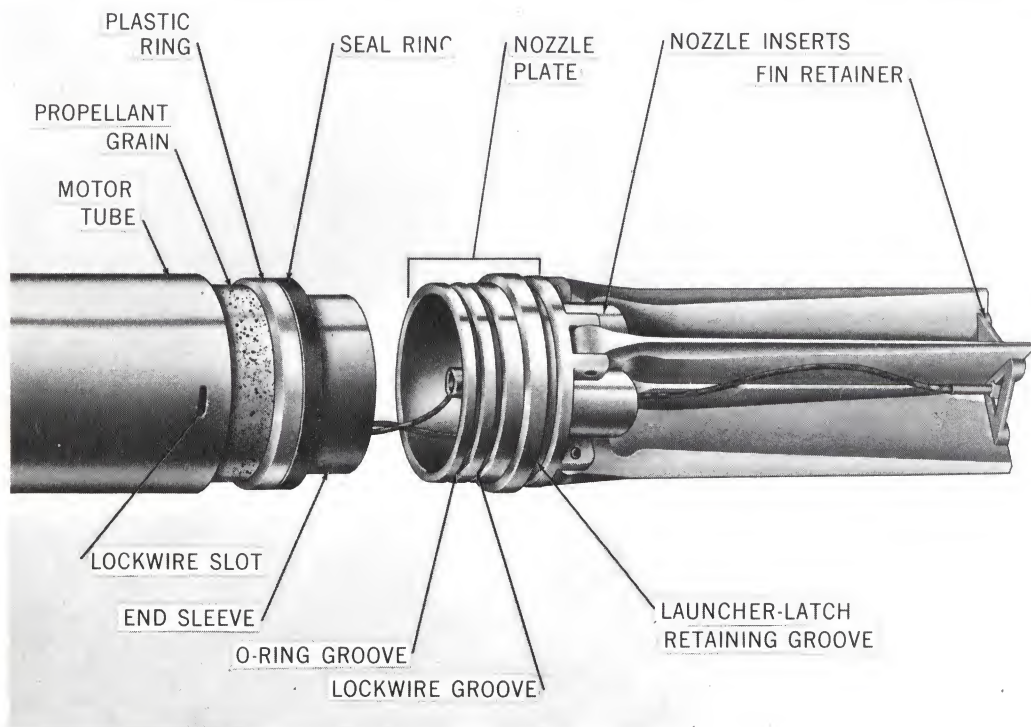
Nozzle-Fin Assembly and Aft End of 2.75-Inch FFAR Motor, With Propellant Grain Partially Out of Motor Tube.
